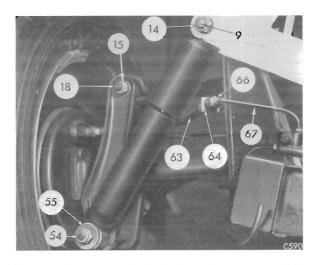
Rear suspension brake hose, damper and vertical link attachments
